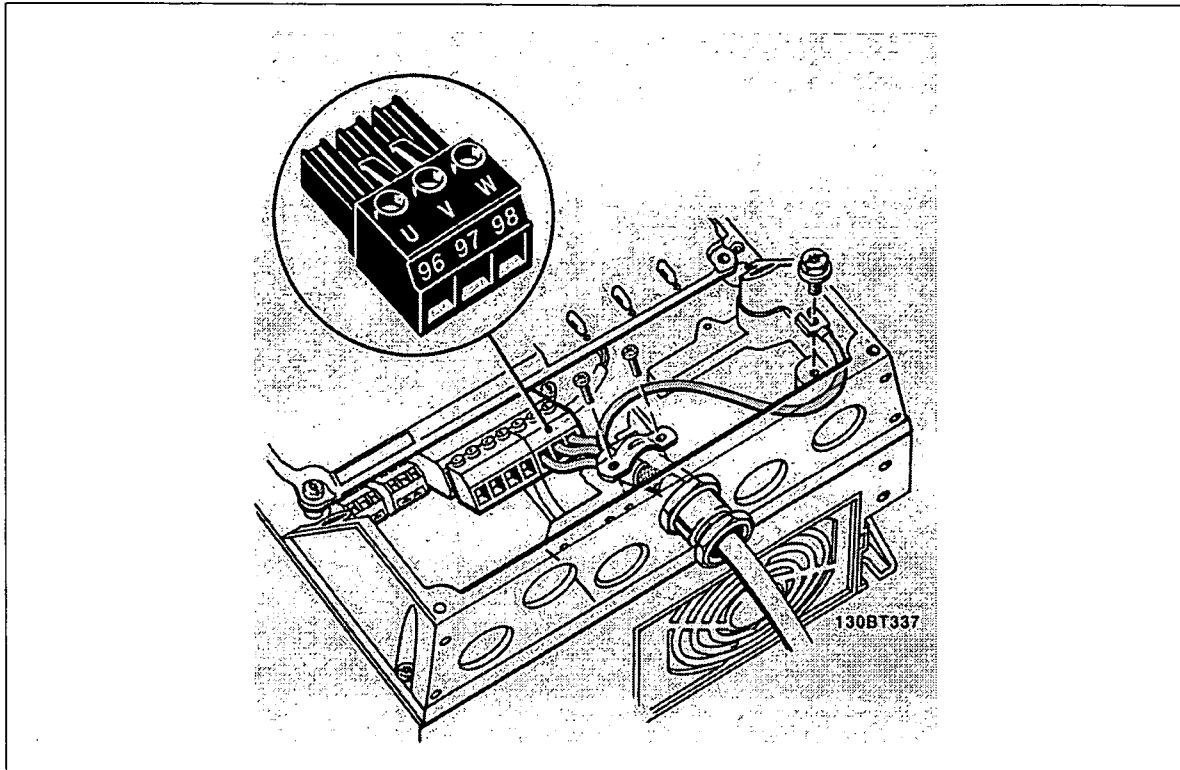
First terminate the motor earth, then place motor U, V and W wires in terminal and tighten. Please ensure that the outer insulation of the motor cable is removed under the EMC clamp.
